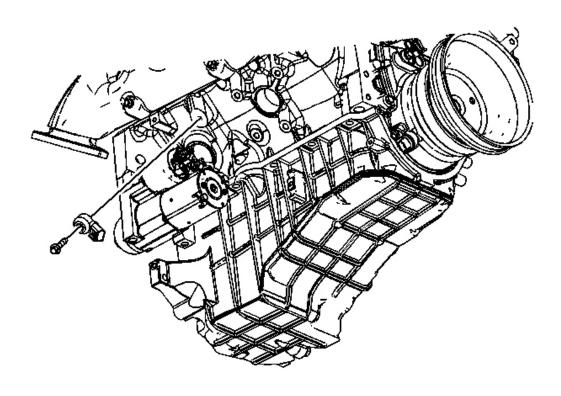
View Of Knock Sensor & Bolt Courtesy of GENERAL MOTORS CORP.
